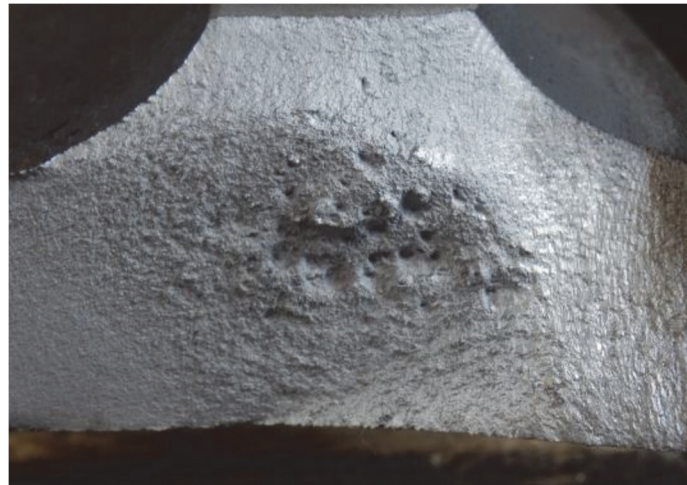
Photograph of fracture of a sample cut from the I-beam.
